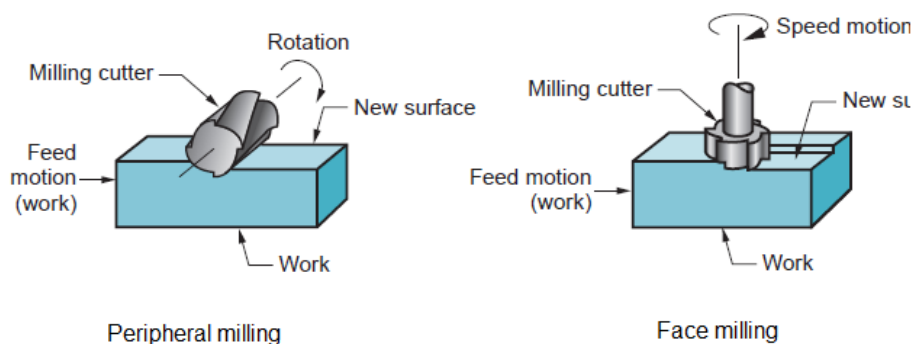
Face milling and Peripheral milling (Groover, 2010)
